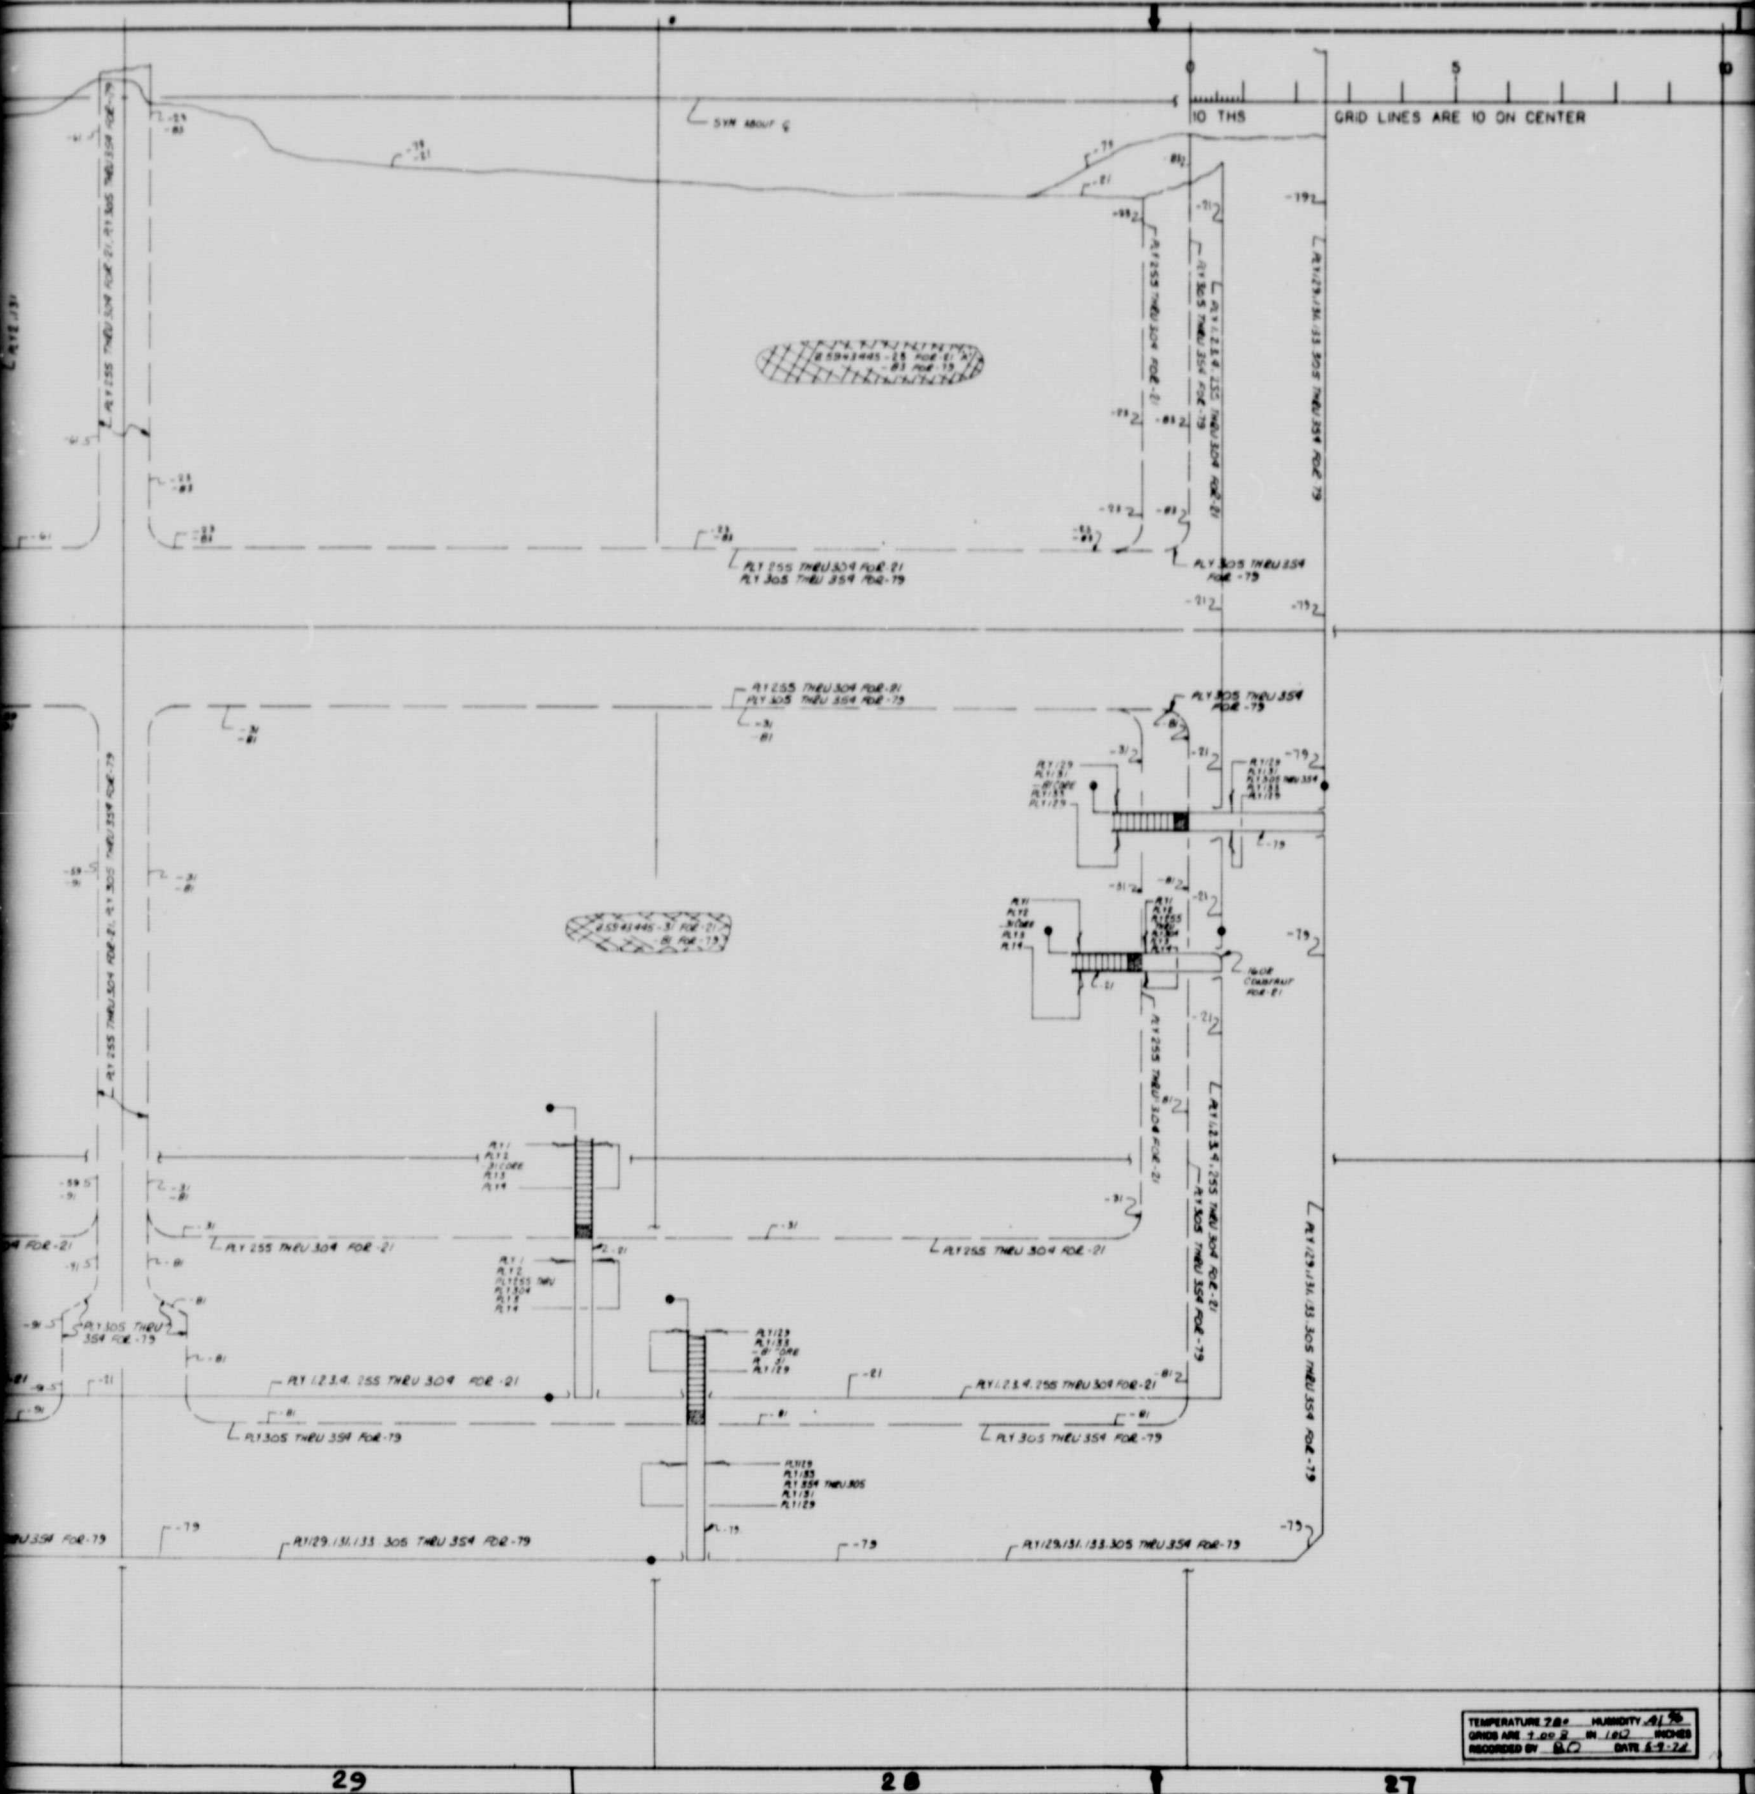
DRAWING Z5943445 - SPECIMEN ASSY -
